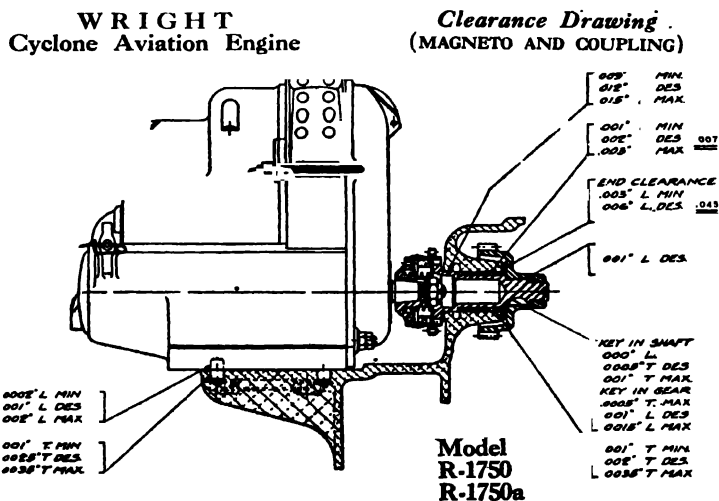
Clearance Drawing of "Cyclone" Engine Magneto and Coupling.
